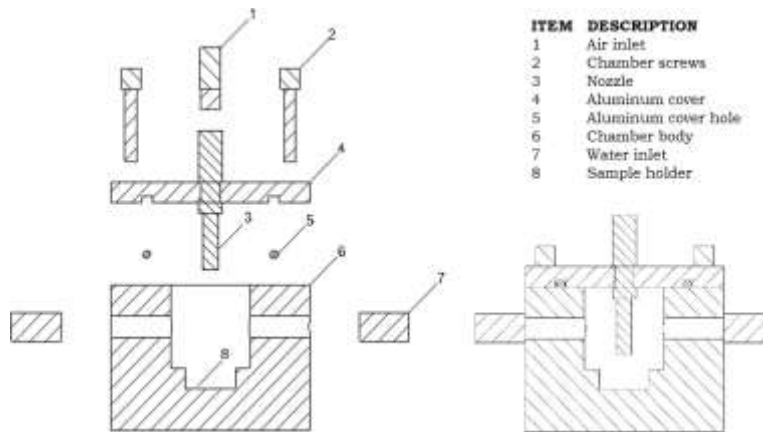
Cavitation chamber assembly, left: exploded, right: joined
